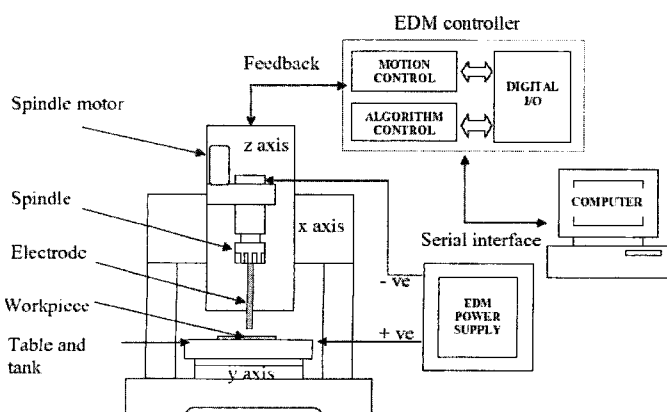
Schematic diagram of the multipurpose miniature machine tool
